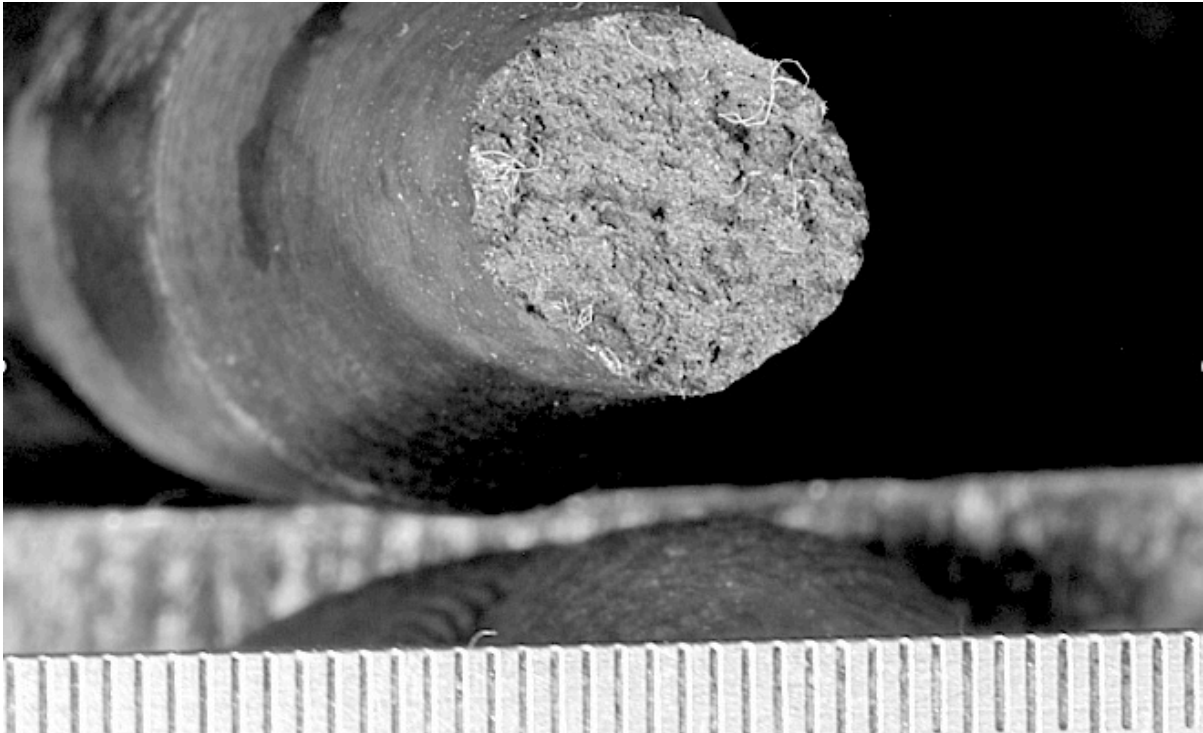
Macro-photographic image of the fracture surface of the specimen S4 halve demonstrated on the left-hand side in figure 30.
